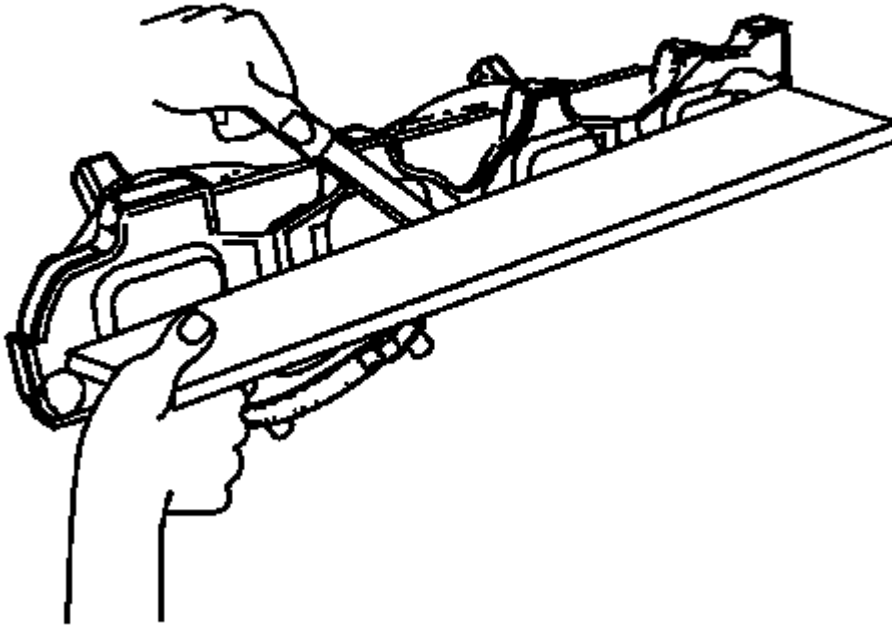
Checking Exhaust Manifold Mounting Face For Warpage
